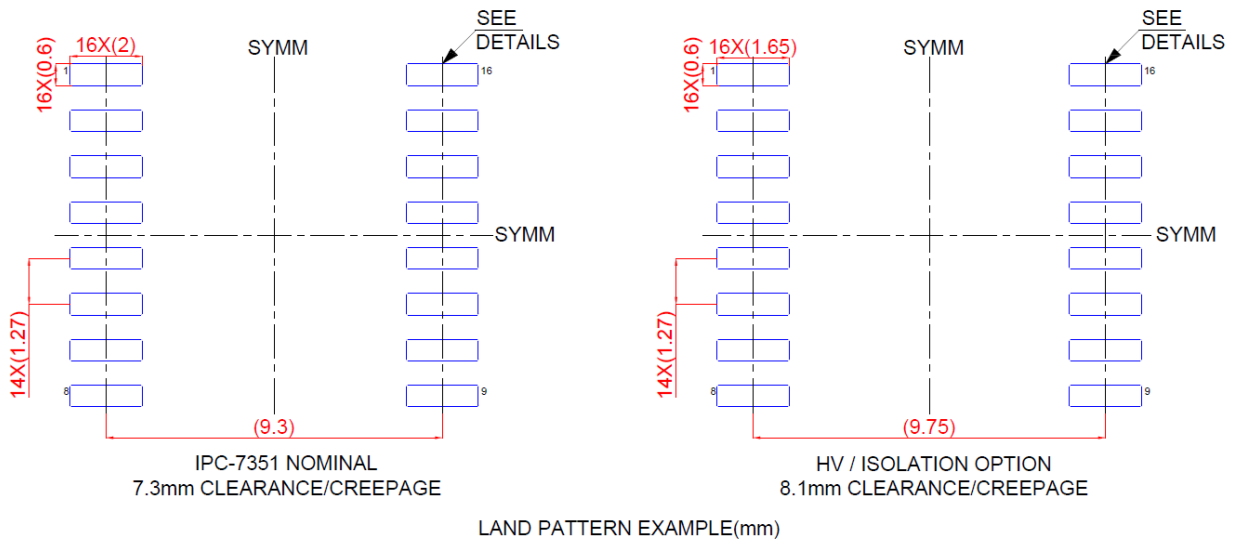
SOP16(300mil) Package Shape and Dimension in millimeters
